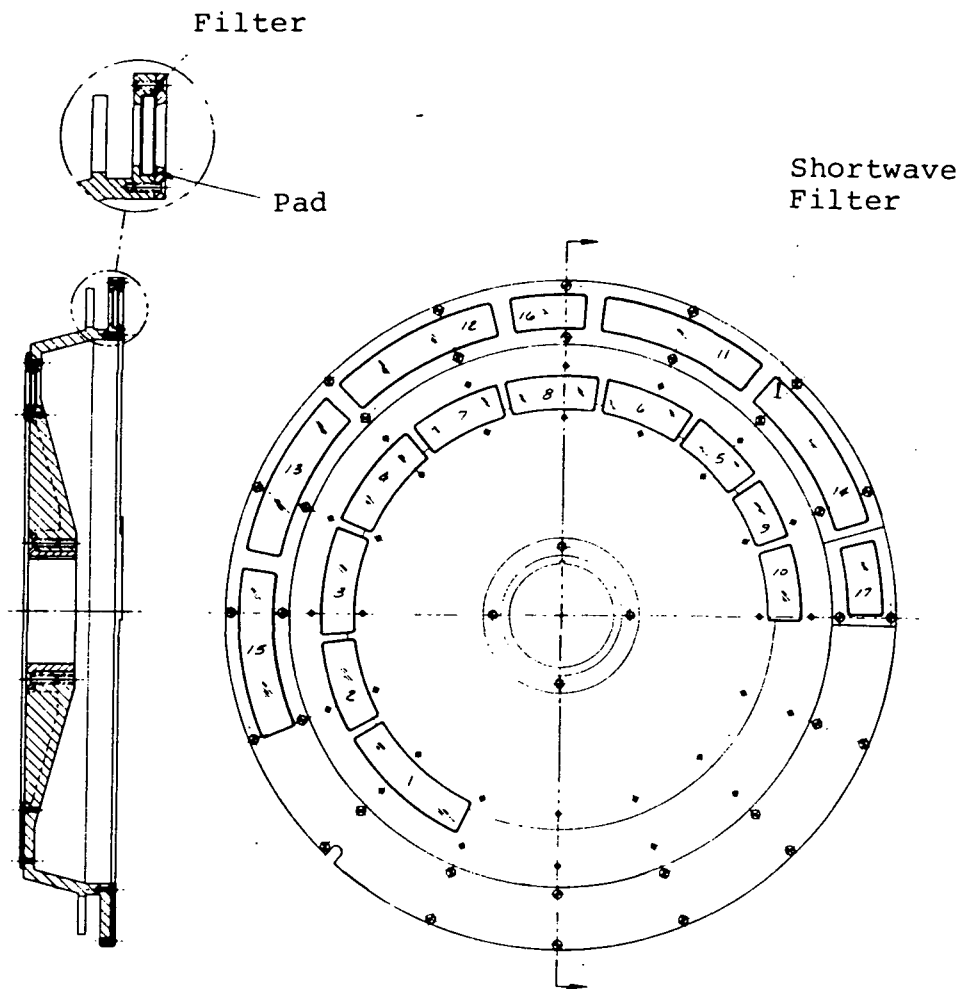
FILTER WHEEL ASSEMBLY
